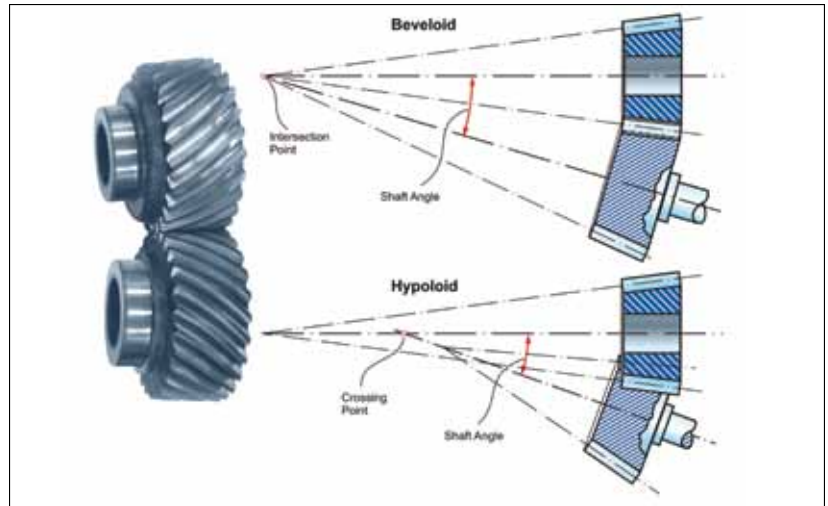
Beveloid photo (left), beveloid and hypoloid gear geometry.
